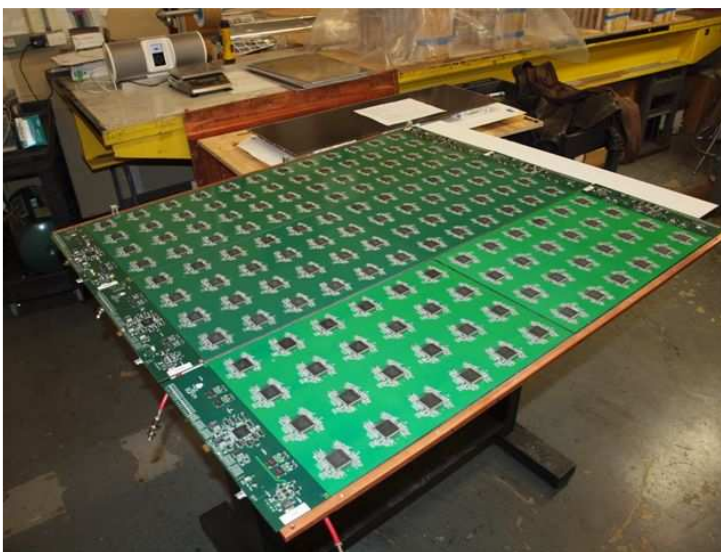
First detector cassette with six front-end boards. The top cover has been removed to show the location of the front-end boards.
